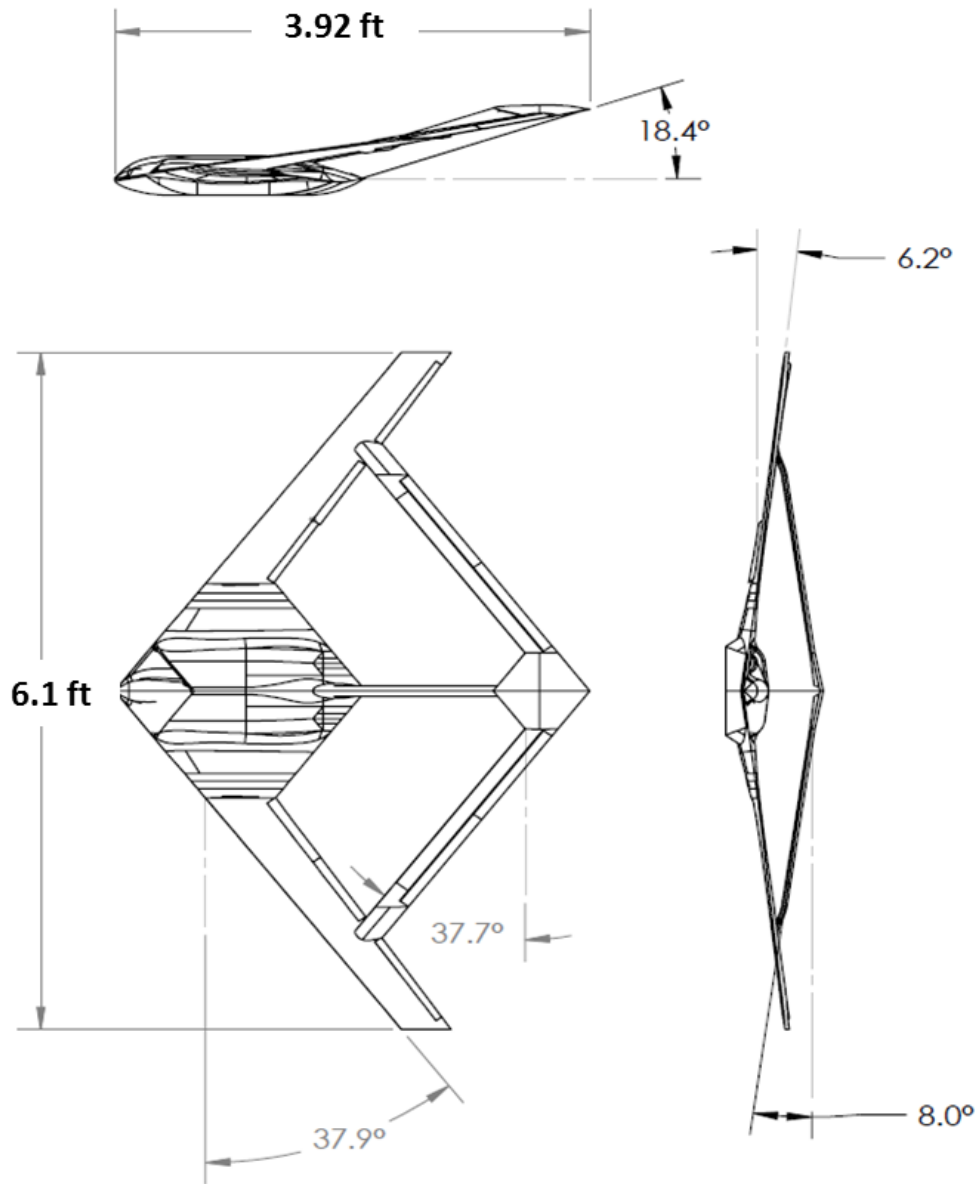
Overall dimensions of Mini SensorCraft (dimensions shown in ft)
